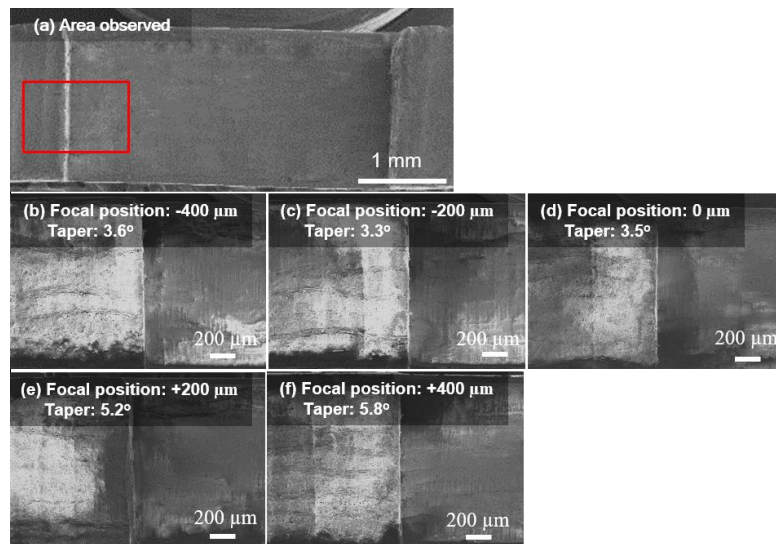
SEM cross-sectional images of holes drilled at laser pulse energy of 700 μJ with different focal positions relative to the workpiece surface: (a) area observed, (b) -400, (c) -200, (d) 0, (e) 200, and (f) 400 μm .
